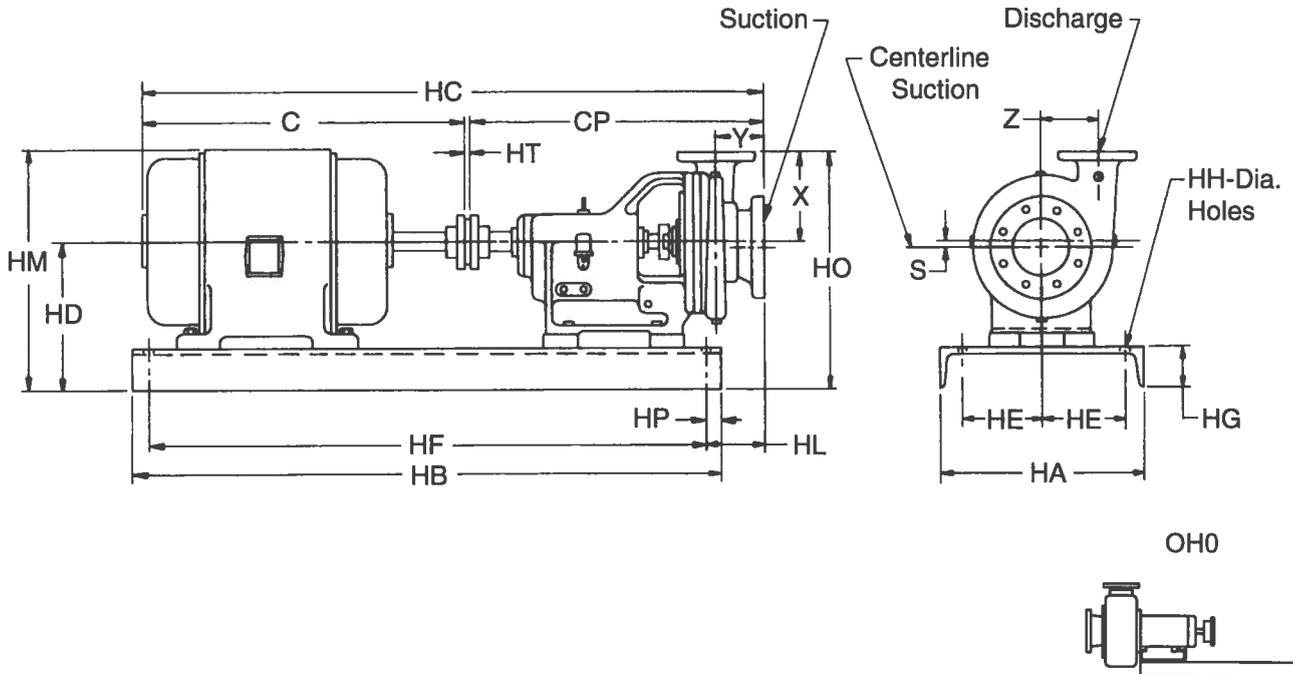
Overhung impeller – flexibly coupled – single stage – frame mounted – pump on baseplate
